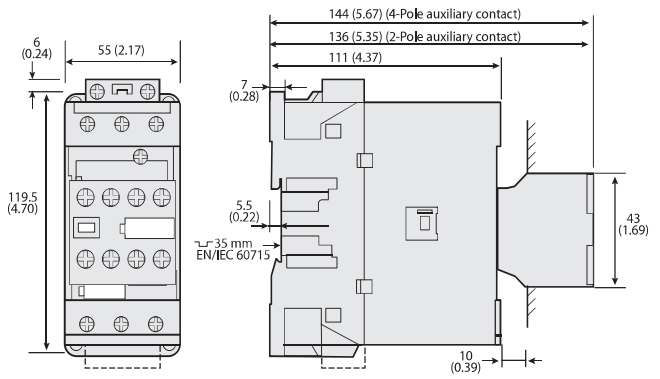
100-E40...100-E65 3-Pole Contactors with Side-mounted Auxiliary Contact
